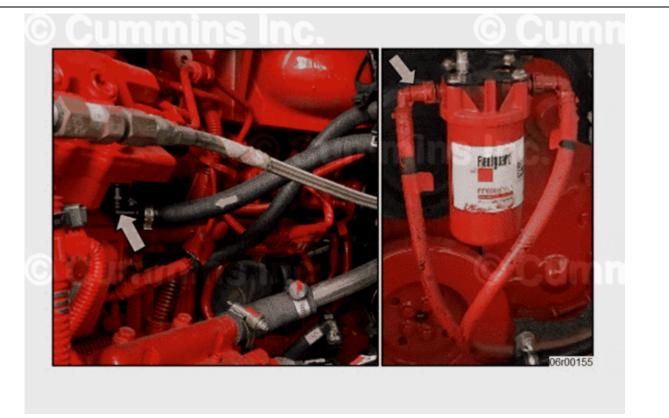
, Indication of Fuel Pump Inlet and Fuel Filter Outlet Quick Connect Fitting Locations.
